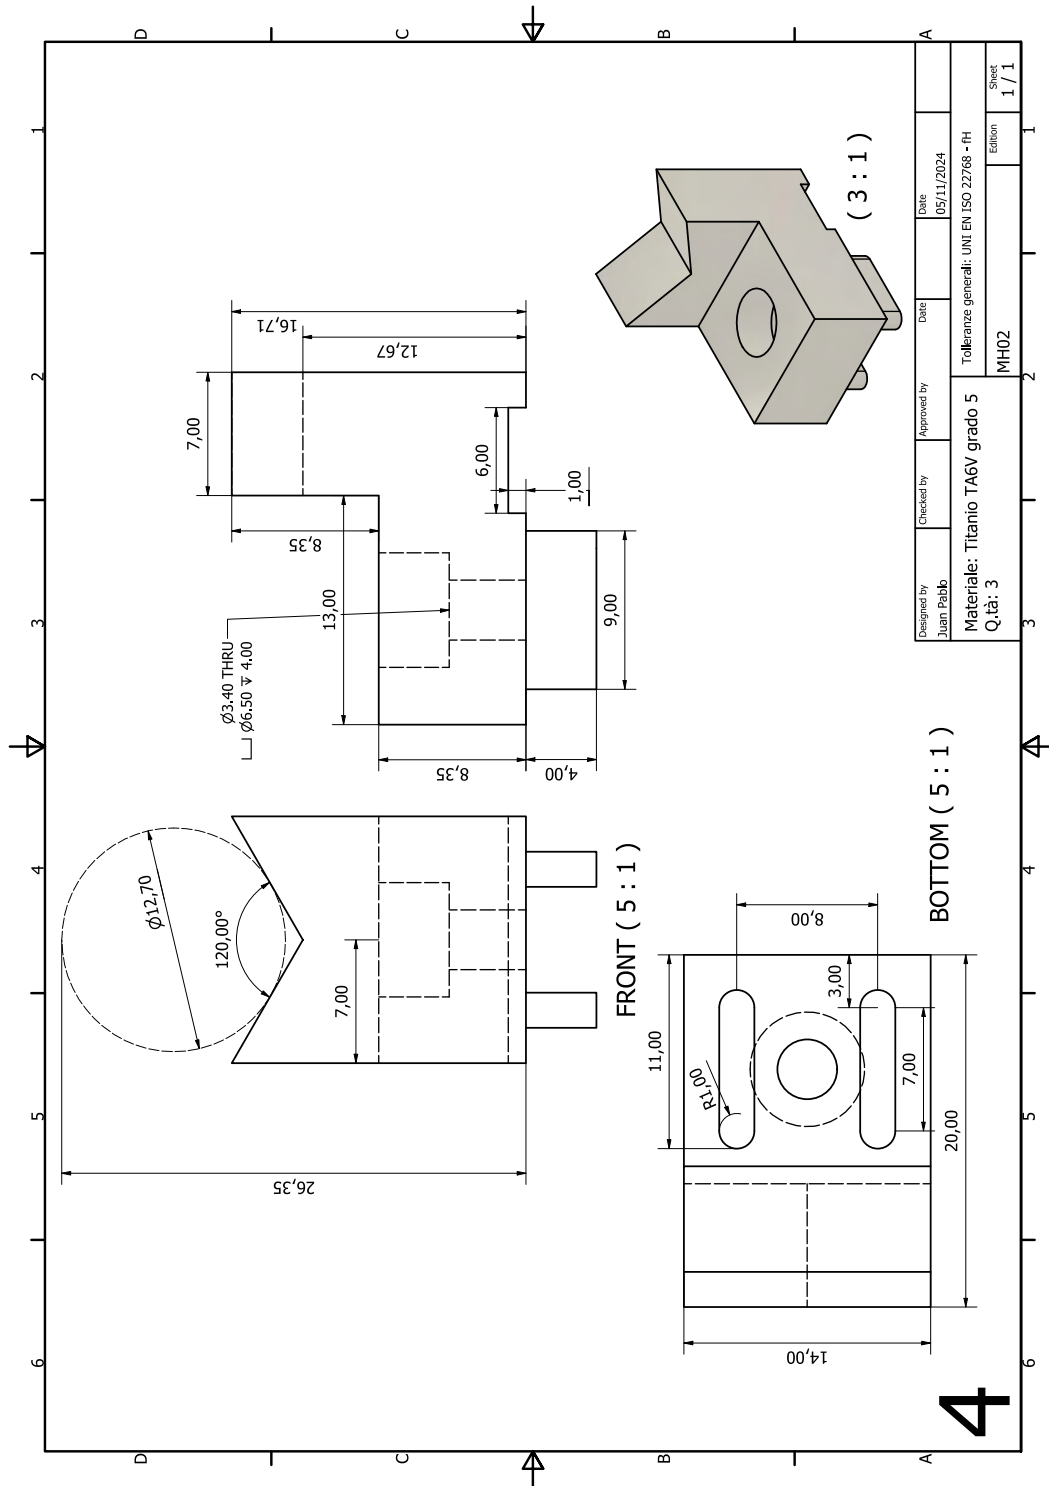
Technical drawing of the monolithic mirror holders for the bow-tie cavity.
